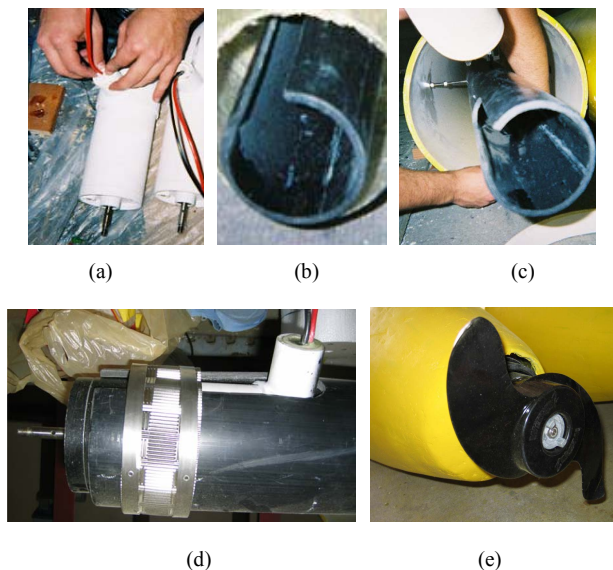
(a) filling the cut shaft with epoxy, (b) slot cut out from ABS for mounting thruster, (c) bolts holding mounting in pontoon, (d) thrusters mounted, and (e) end cap mounted
